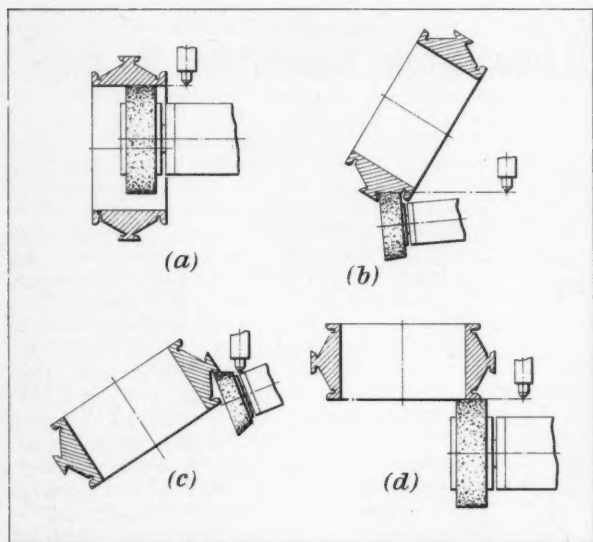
Four stages in grinding the bearing ring are here shown diagrammatically. At the end of the sequence, the ring is removed and turned end-for-end, to enable the remaining faces and track to be ground
